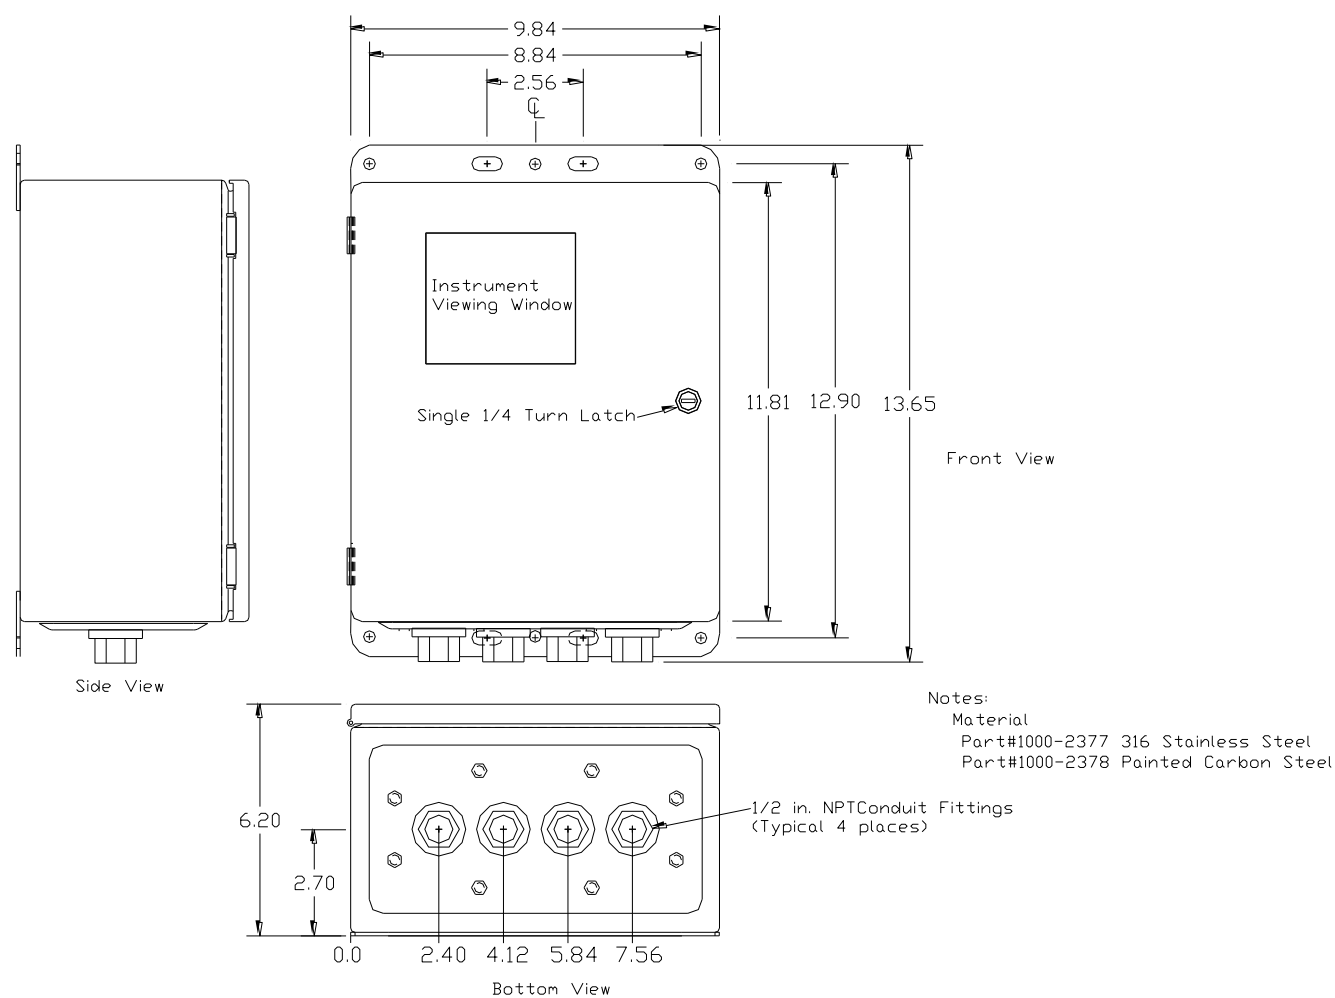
WLR/SS NEMA 4X Stainless Steel Wall Mount Enclosure
